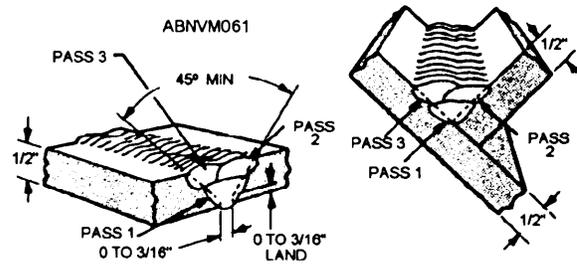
Joint design and weld pass sequence flat-position multipass butt welds in aluminum plate.
